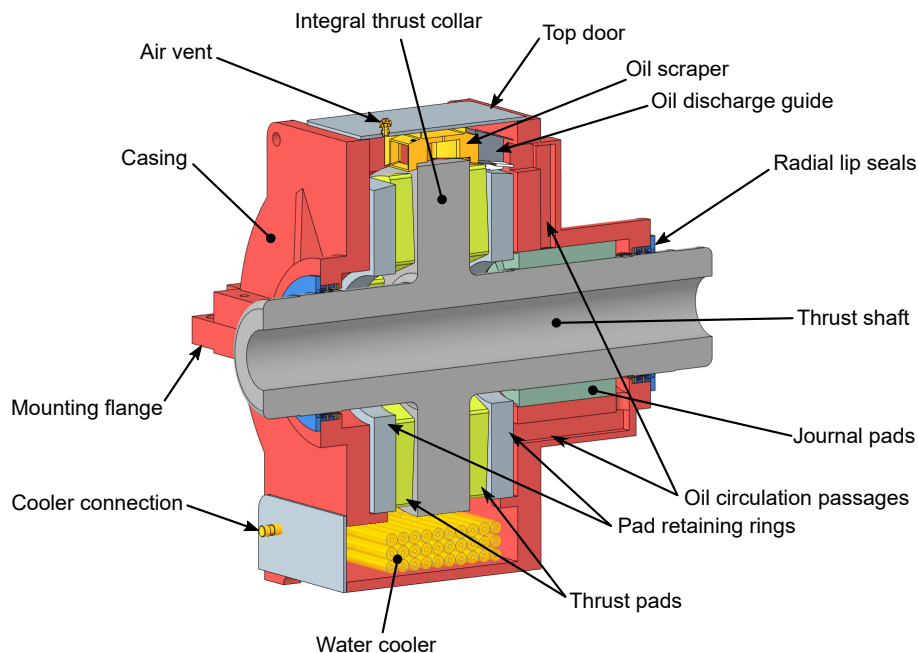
Annotated drawing showing components of a typical water cooled self-contained thrust block
